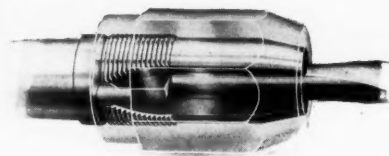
Drill in Chuck, showing Long Grip in the Grooves
